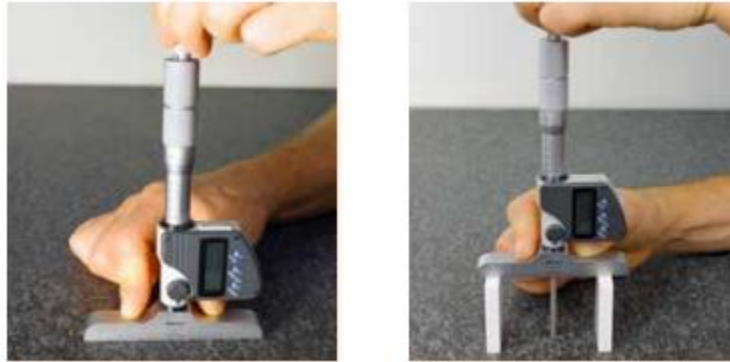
Use gauge blocks to check the setting of depth micrometers
